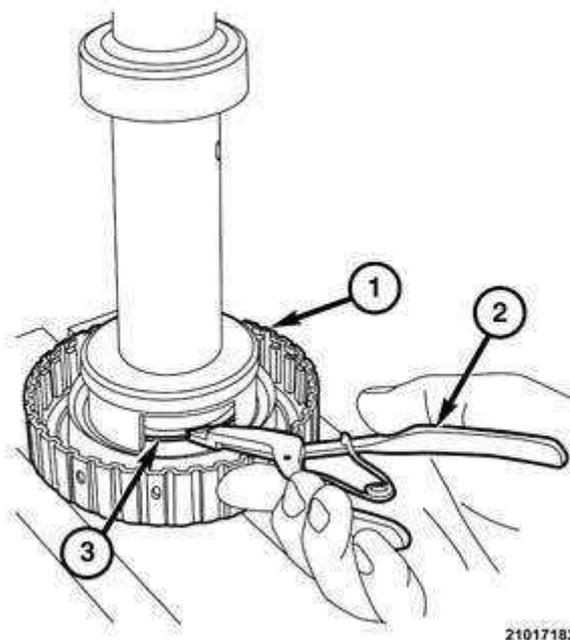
3-5-R Clutch, Balance Piston & Snap-Ring
